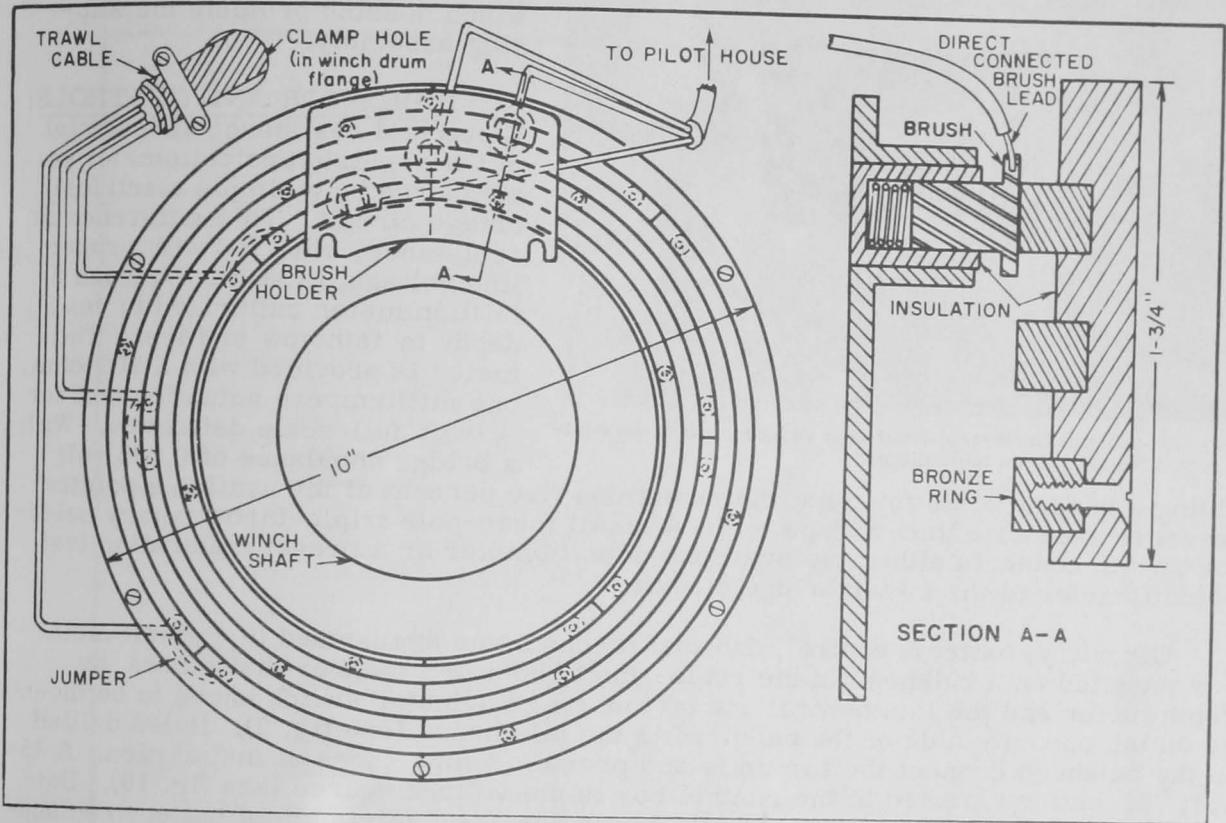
Slip-ring and brush assembly for the electrical depth telemeter.
